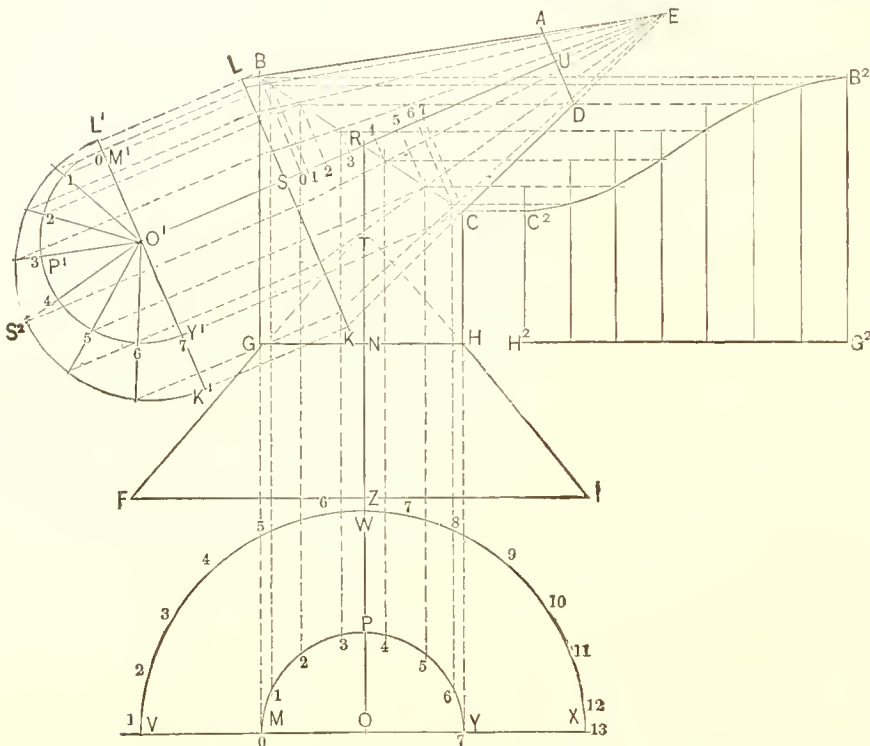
Three-Piece Elbow in Flaring Pipe, the Middle Section of which is Straight.
